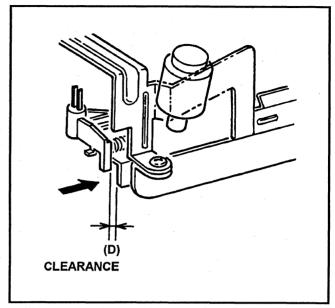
Cleaner Solenoid Position Adjustment
